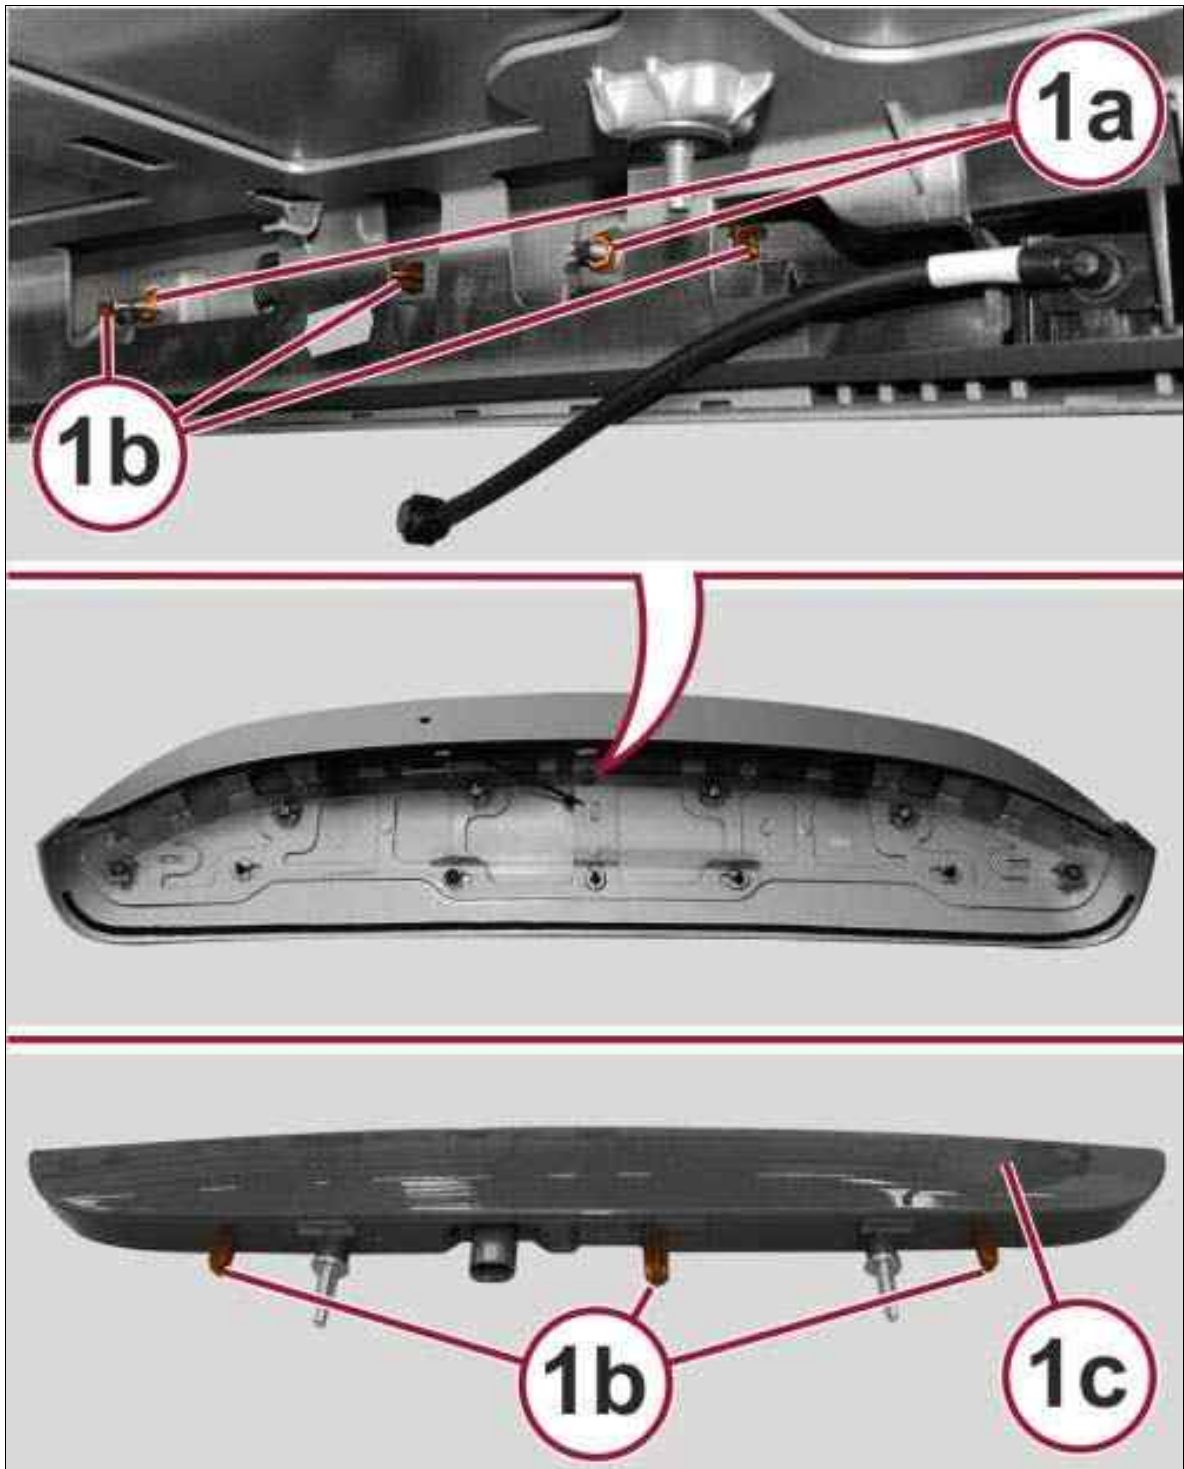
Rear Spoiler, Electrical Connector, Washer Hose, Washer Jet & Retainers
